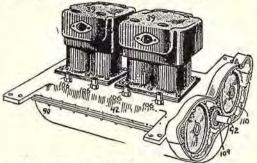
Cylinders, valve-plunger guides, timing gears.
